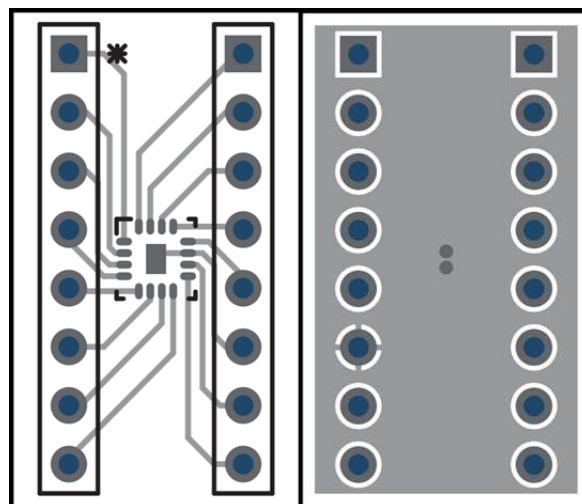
RTE package top layer (left) and bottom layer (right) PCB layout
